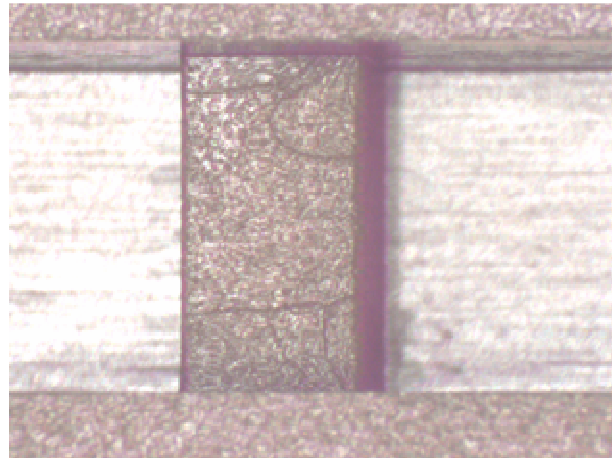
Molding defect (weld lines) on an iris in an mid E-plane split filter due to improper mold filling
